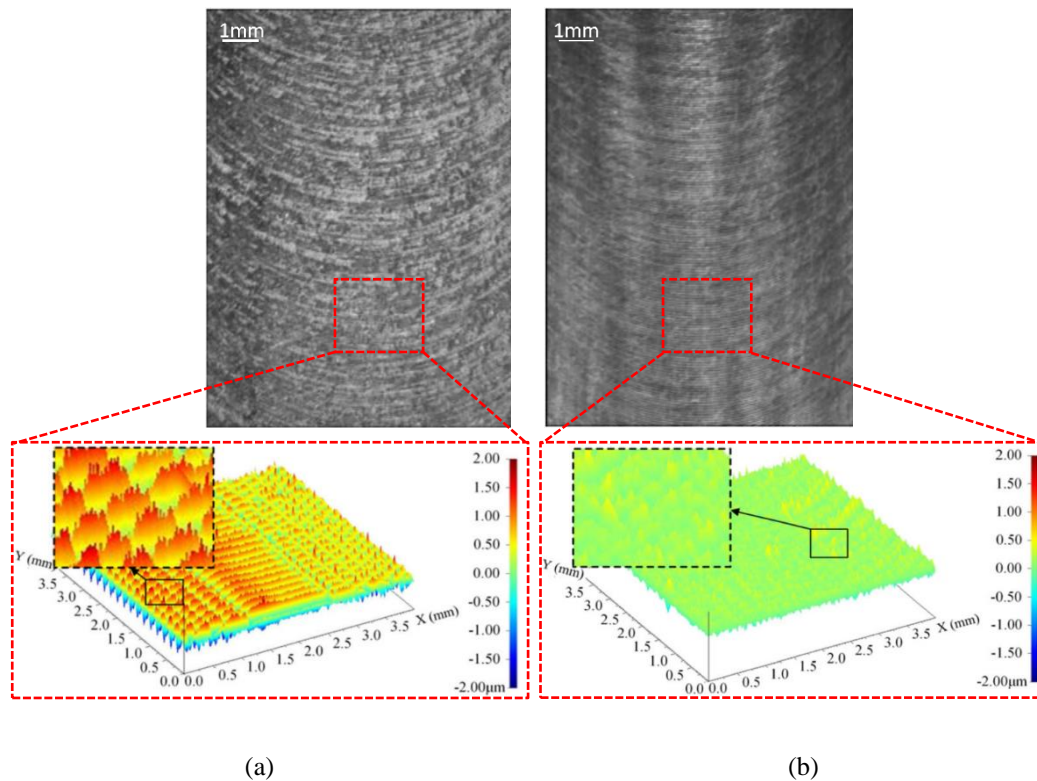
Machined surface macroscopic images and their 3D topography for run no. 19 of (a) conventional milling on the left and (b) UVAM on the right.
